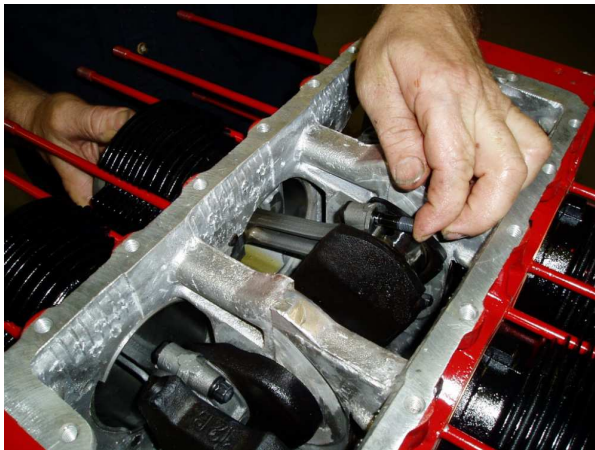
Installing a Piston/Cyl/Rod assembly in a 100 HP engine
